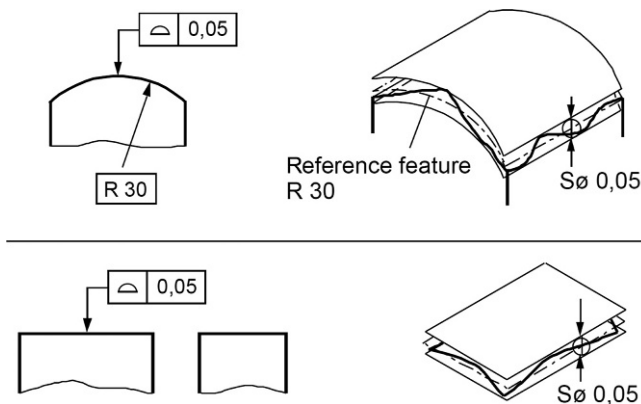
Form tolerances of surfaces: drawing indications, tolerance zones
